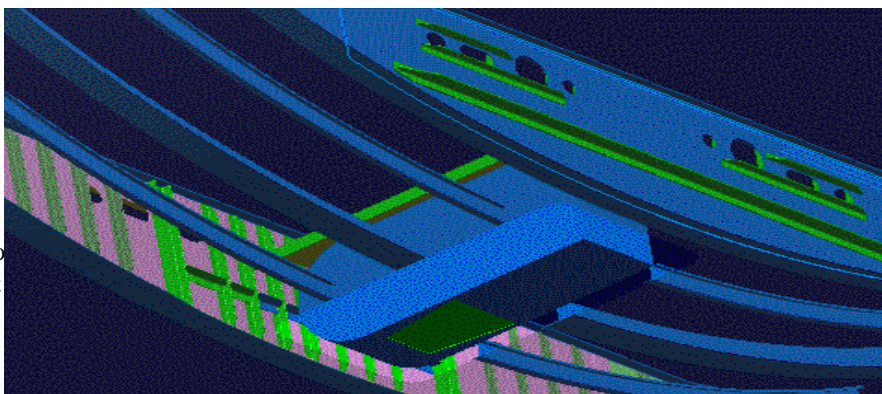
Cutaway View of Fwd/Aft Fuselage Installation
